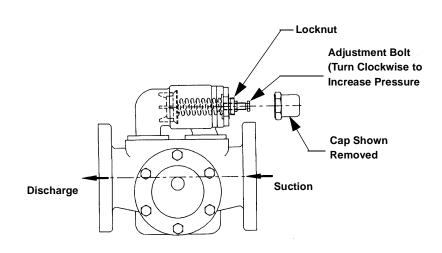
LUBE OIL PUMP - JGE/6
